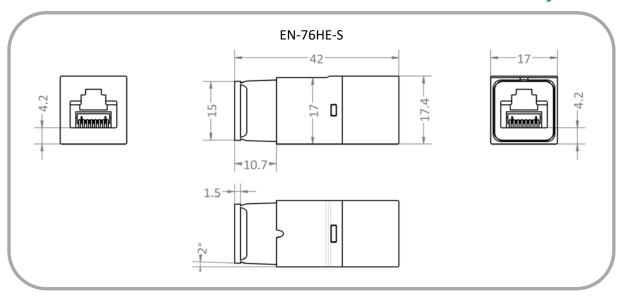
Figure 1 Technical drawings for EN-76HE-S. All dimensions are in millimetres.
